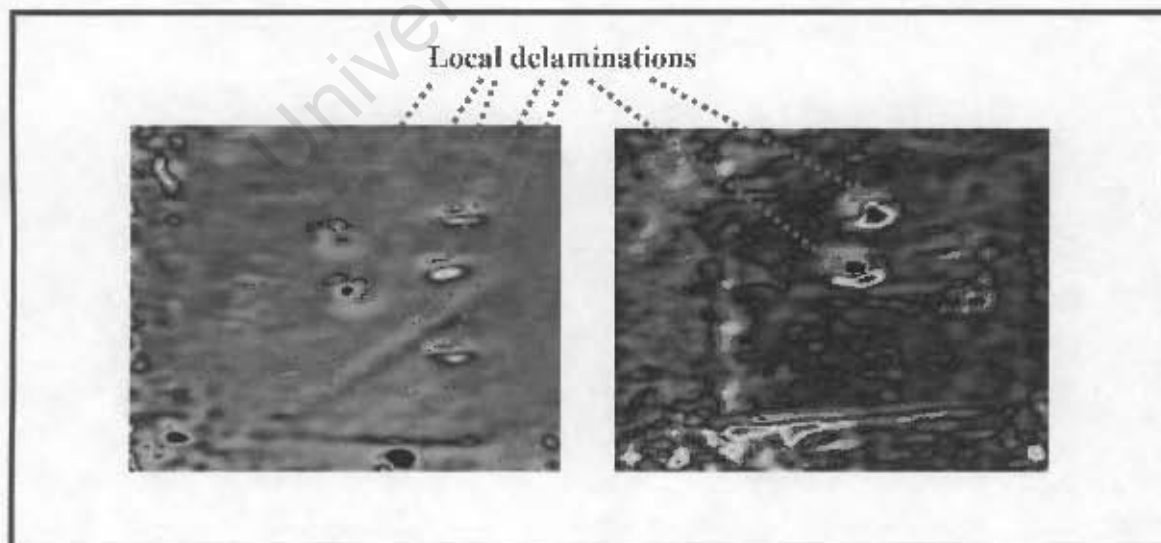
Inspection results on both sides of $800 \times 600 \text{mm}^2$ field on the rotor blade with defects [56]
